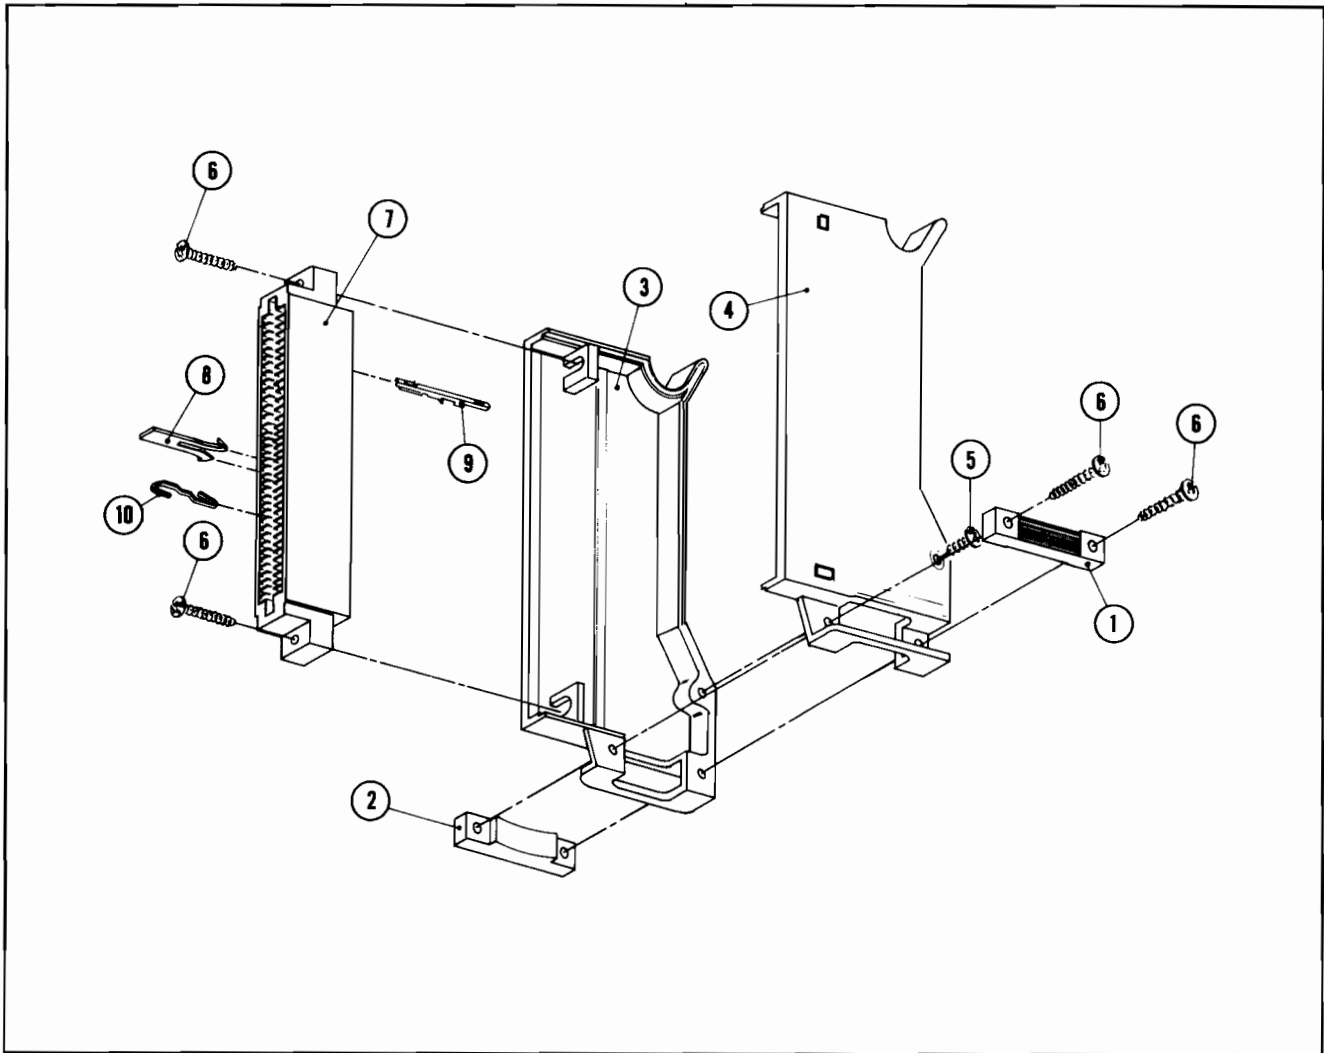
External I/O Connector Assembly, (HP P/N 5060-2806) Exploded View
